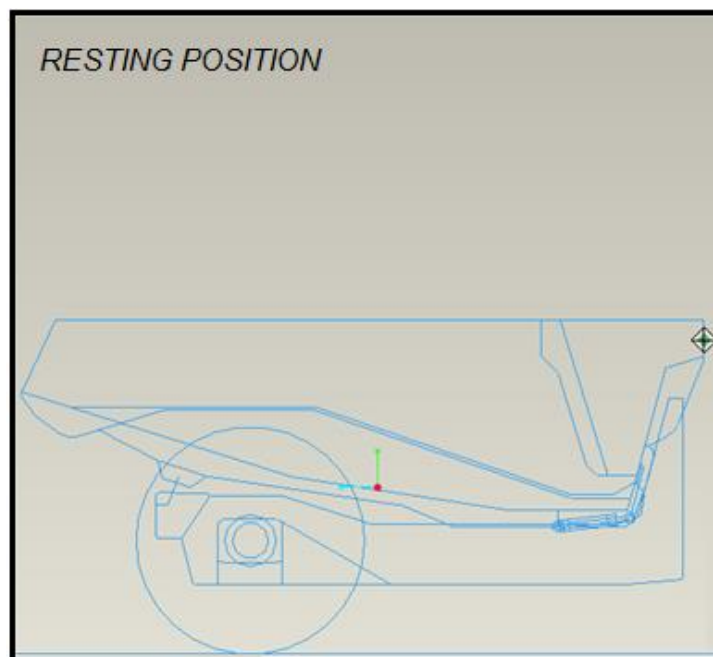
Two dimensional illustration of the Folding Box Concept 1 featuring a cylinder assembly in its lower front section. The box here is at its resting position and the cylinder is fully retracted.
